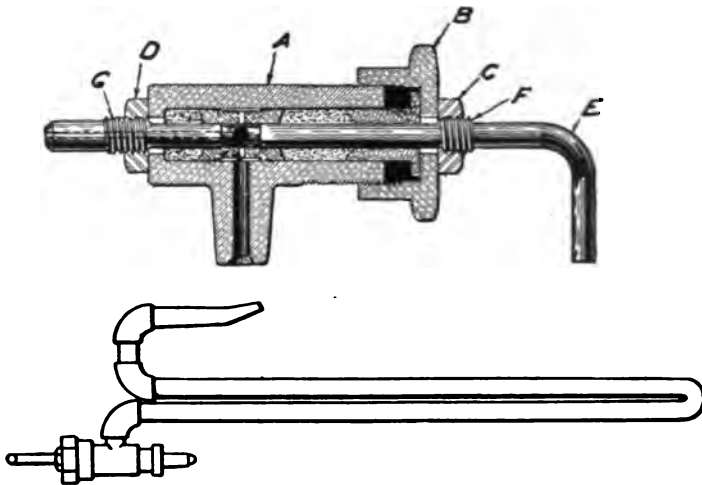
Usual pattern of "torch" head and starting "torch," used on several American steam carriages. The head parts are lettered as follows: A, body of head; B, threaded cap; C and D, nuts working on screws, F and G, on rod, E. Screw, G, gives attachment to the collar on the valve stem, as shown at B, in the succeeding figure.
